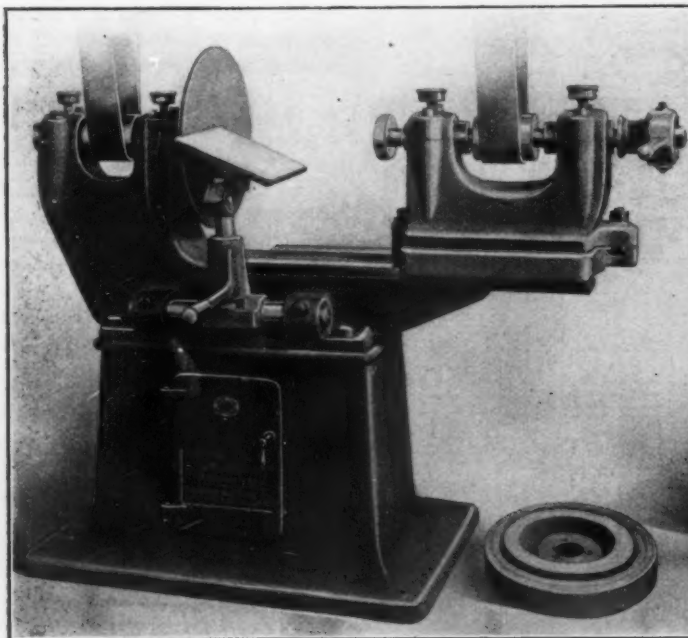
The No. 6K Gorton Disk Grinder Arranged as a Single Disk Machine.
